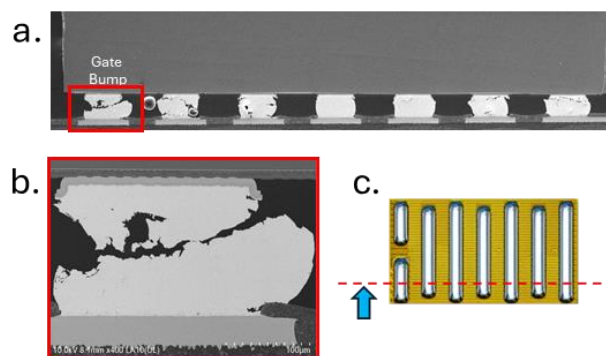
(a) Cross-section of an EPC2218 TC failure; (b) worst solder joint cracking observed in corner gate bump; (c) direction of the cross-section view.
